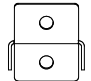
Detail H - Mount the overdoor bar (pos. JBD 46) on the hinge pillars (pos. JBD 50) and on the roof connecting plate (pos. JBD 19/X).
